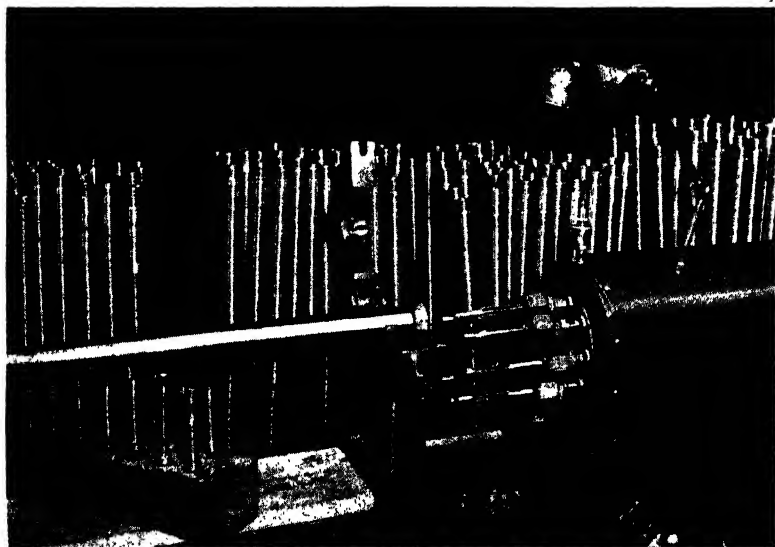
Gear Shaper Machining the Wrist-pin Boss on Master Rod
